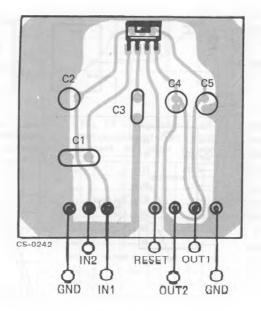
P.C. board component layout of fig. 2 (1: 1 scale)
